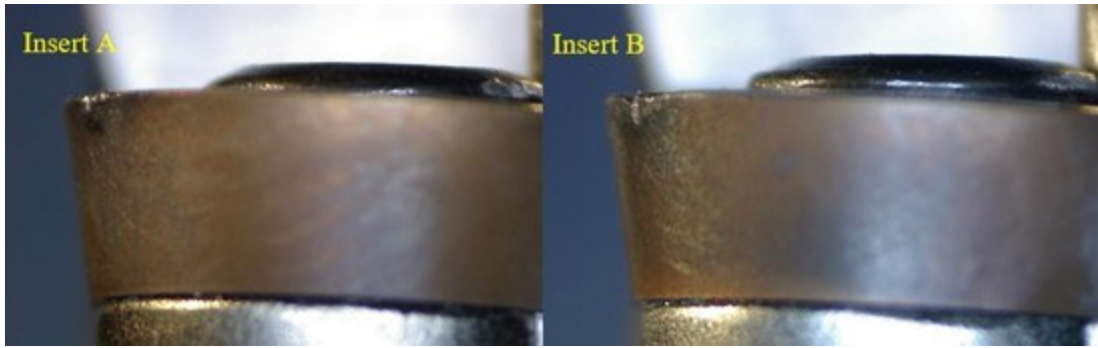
The wear images of insert A and B after milling five layers of the workpiece.
